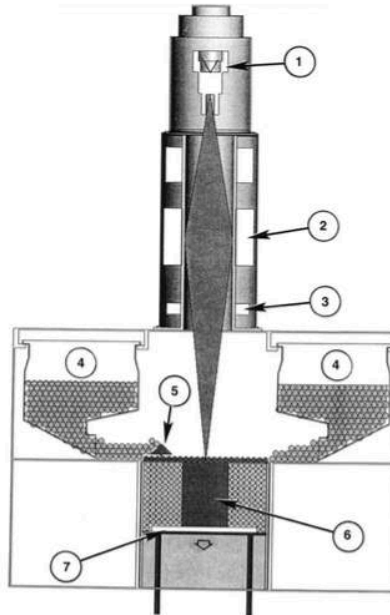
EBM system schematic showing key components: (1) Electron gun assembly; (2) Electron beam focusing lens; (3) Electron beam deflection coils (x-y); (4) Powder cassettes; (5) Powder layer rake; (6) Cylindrical build test specimen; (7) Build layer [8].
